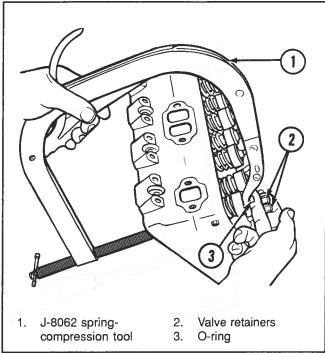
Compressing Valve Spring With Cylinder Head Removed
